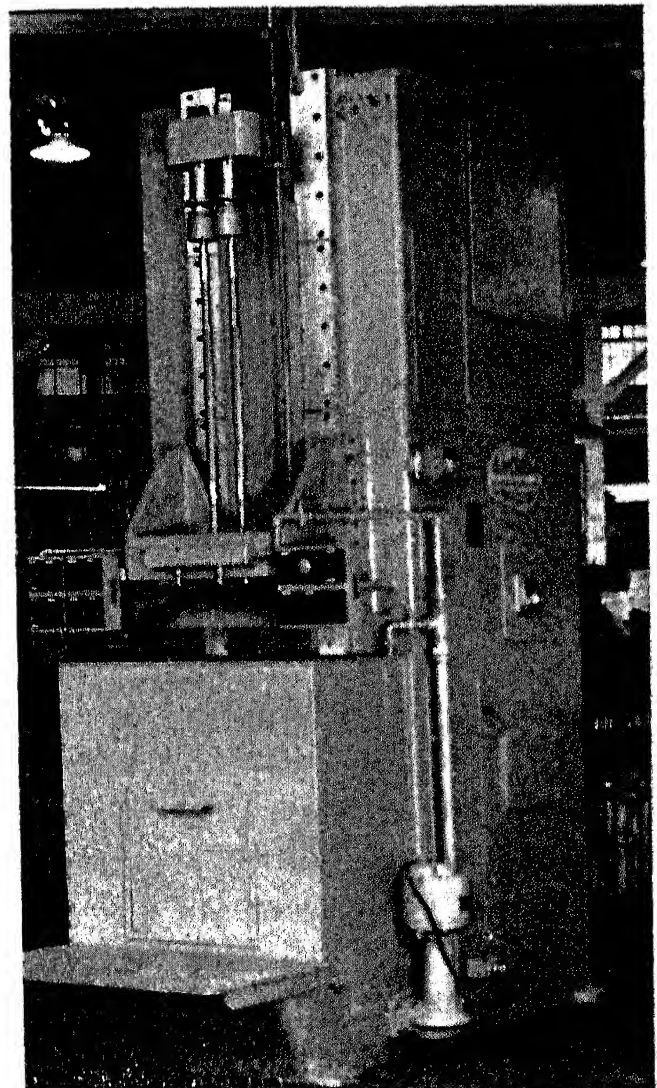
A 15 ton vertical pull up broaching machine with a 48 in. stroke. (Courtesy American Broach and Machine Co.)
